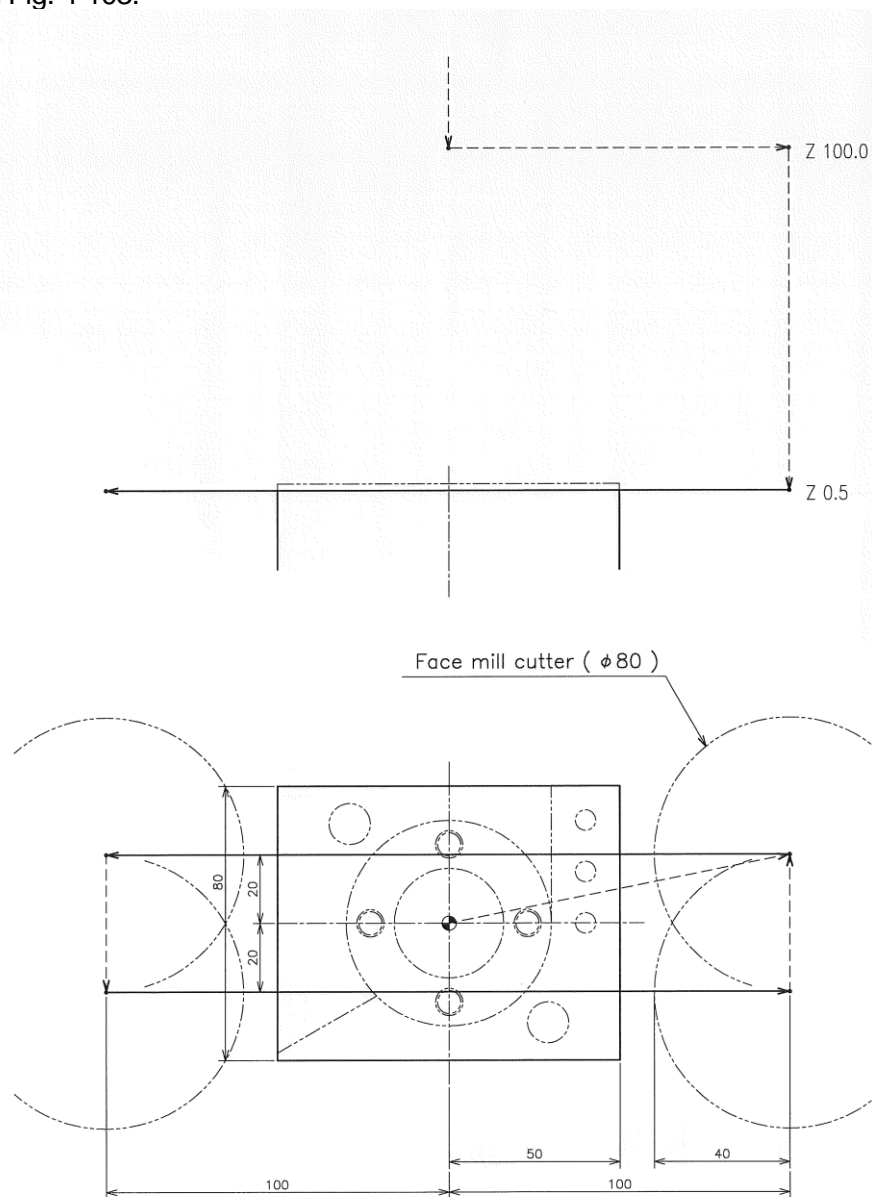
Tool path diagram with a face milling cutter ( rough machining)
